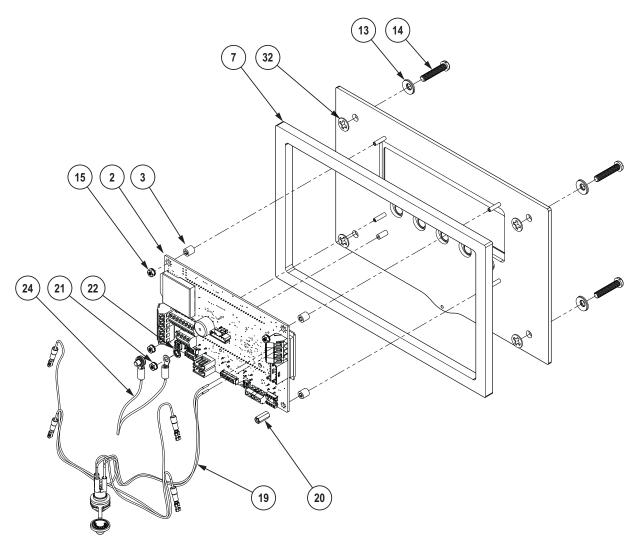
380 Replacement Parts Diagram — Rear View
